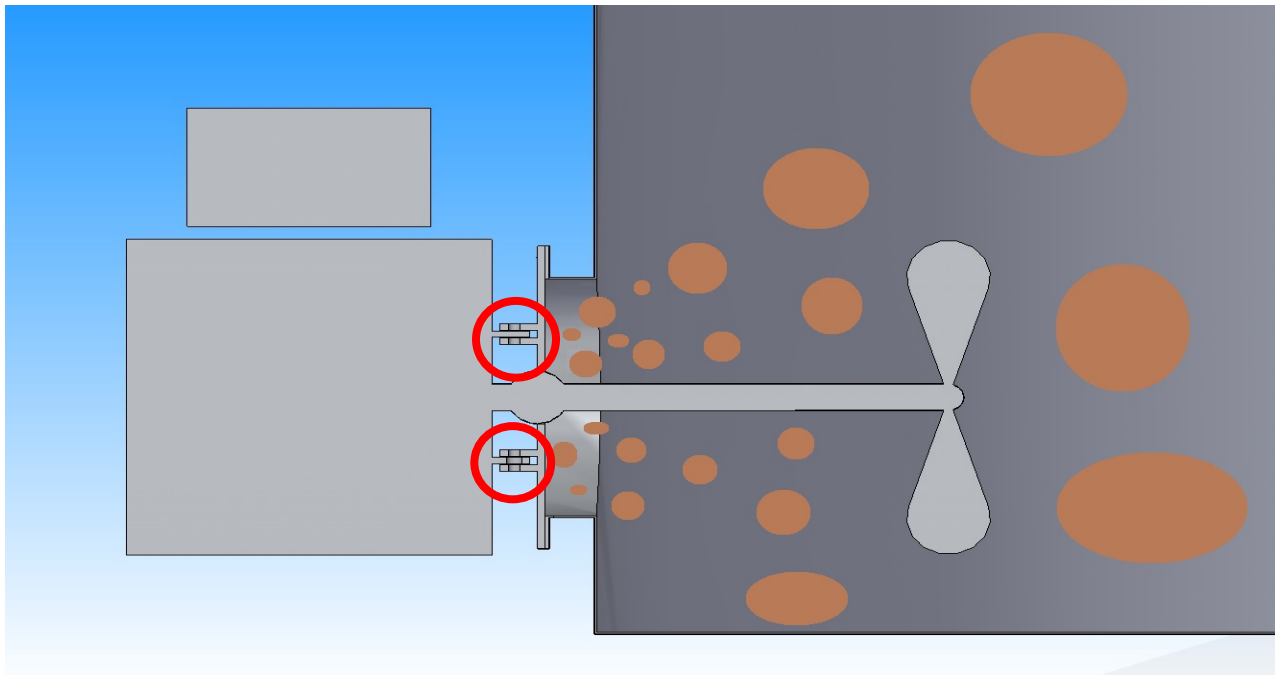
Upper and Lower Hinge Pin Assemblies Circled in Red
